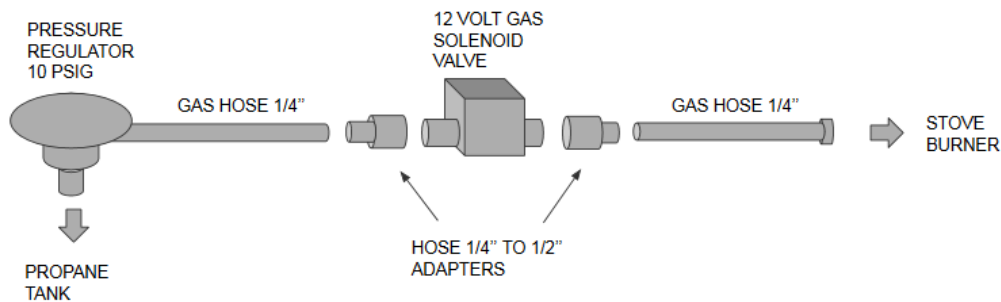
Assembling Diagram 1 - Solenoid Valve Installation
